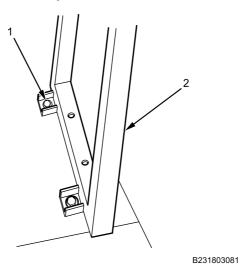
Gunner Platform Stand Floor Mounting Bolts.
